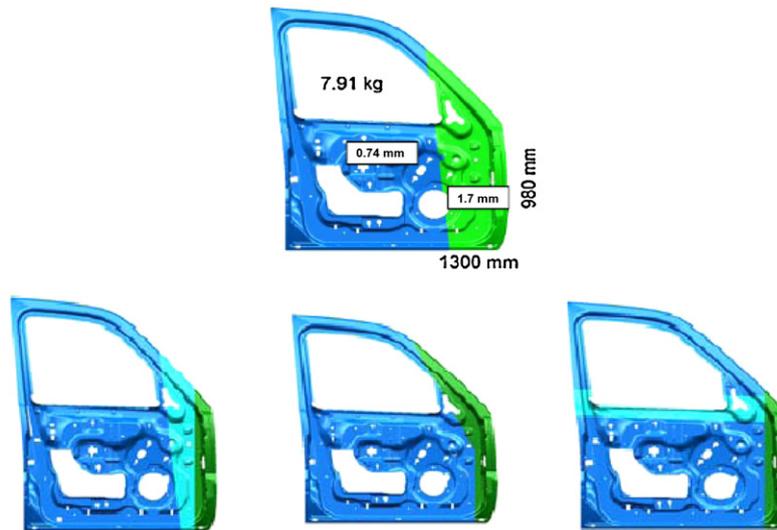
Tailor welded blank applied for door inner [50].
